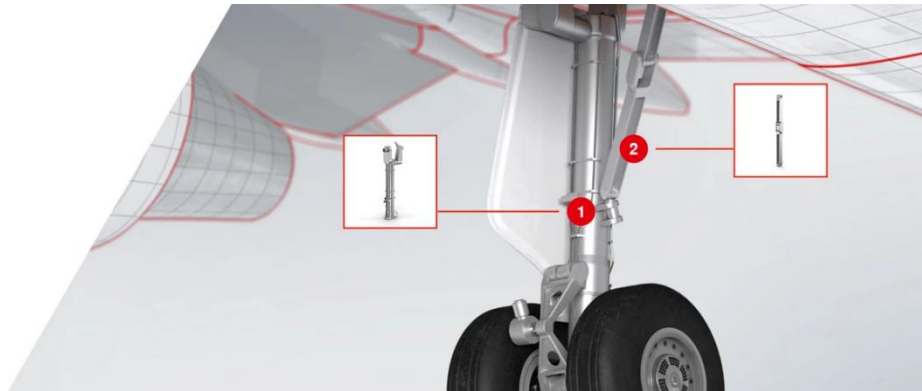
Landing gear parts:1-Main cylinder; 2-Landing gear strut
